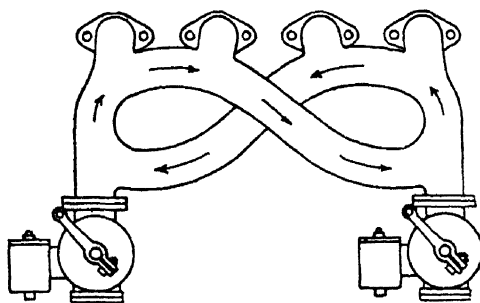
Racing Engine type of Uniflow Induction Pipe.
